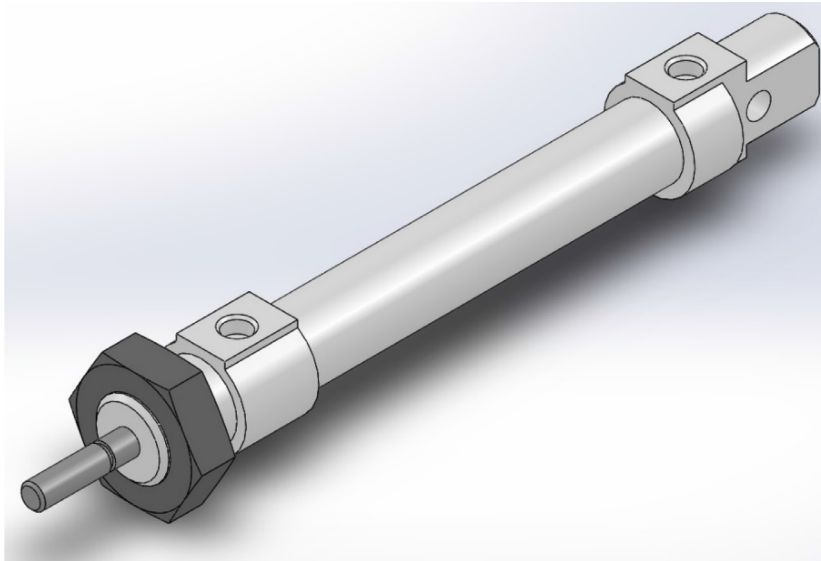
3D design of the cylinder jack in a conveyor machine.
